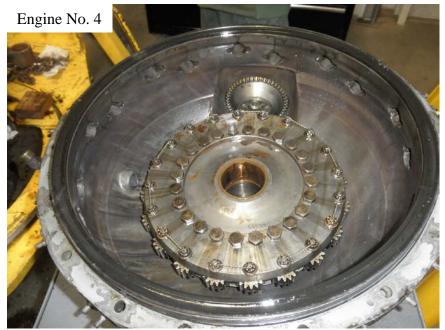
View of the planetary gear carrier showing it was intact and all of the planetary gears were in place.
